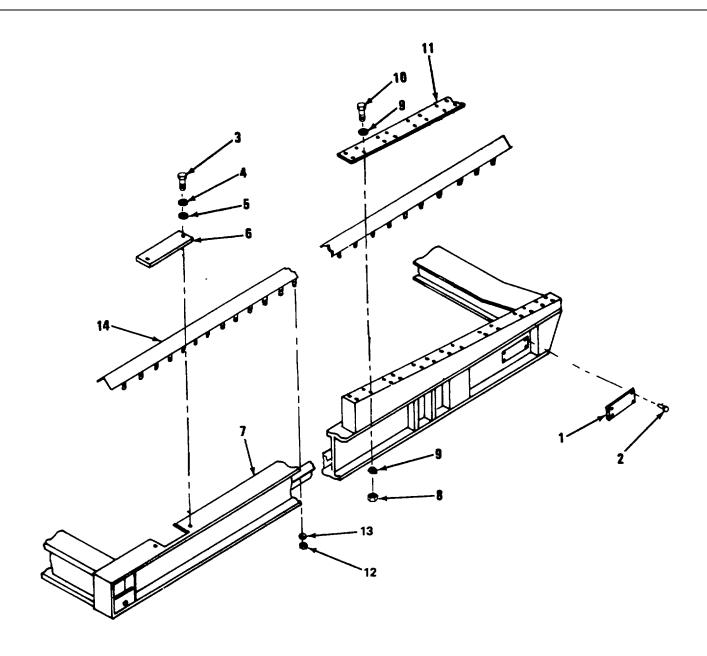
Access Cover, Rails, Pads and Data Plate.
